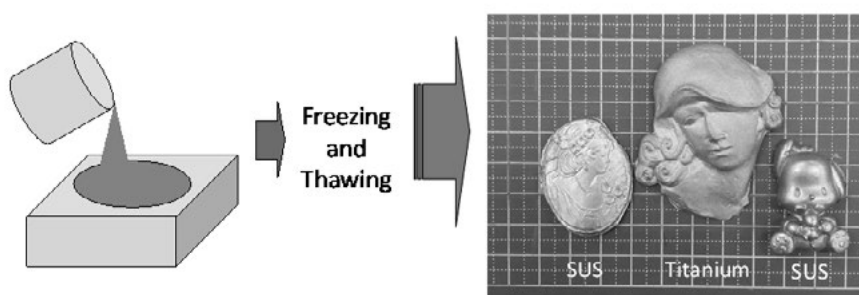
Slurry casting method using PVA cryo-gel.
